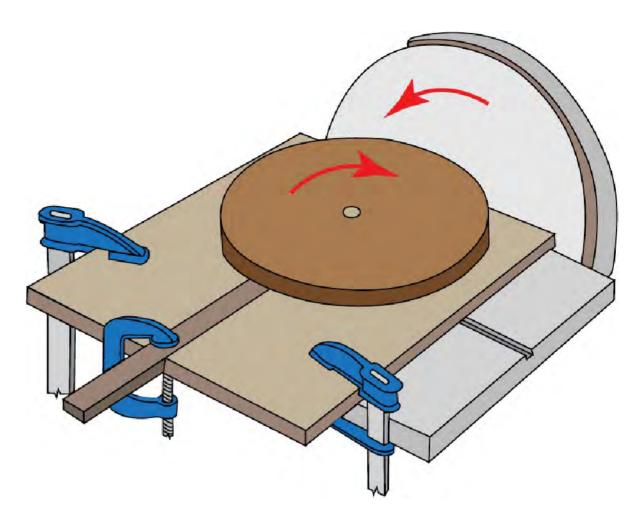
The Jig in Use. Rotate the piece against the disc until a circle is achieved.
